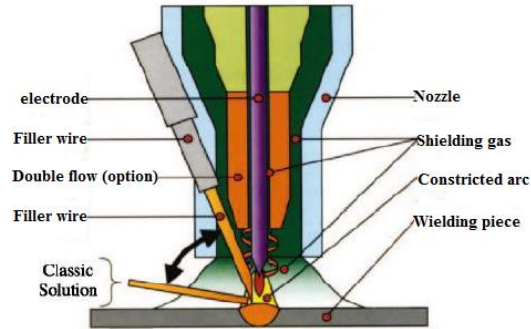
Layout of TOP TIG welding torch [11]
